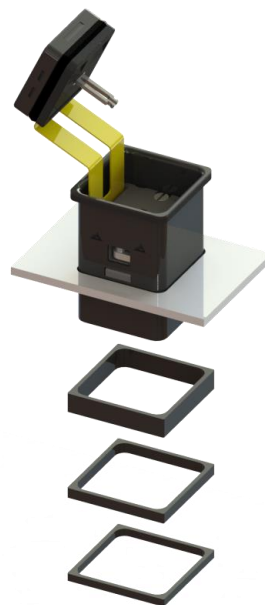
Mounting Cam in Locked Position (flush mount version shown)
